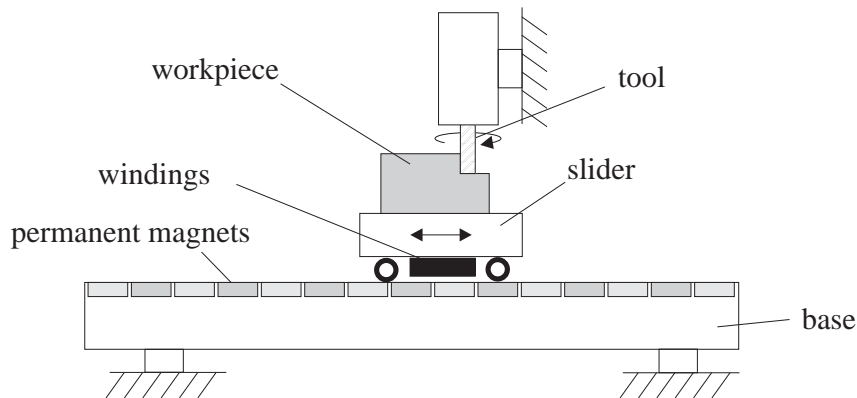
Permanent-magnet linear-motor machine tool axis.
